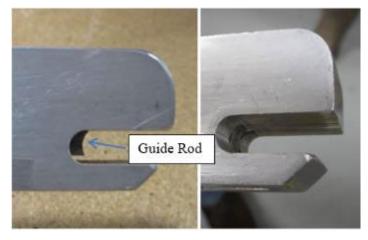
Guide Rod Adjusted From Sticking Out (left) to Flush With Face (right)
